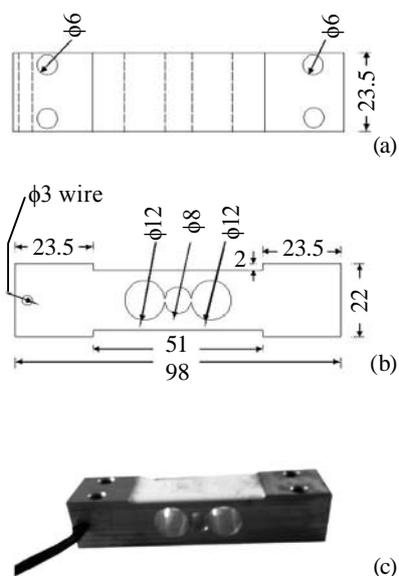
(a) Top view (b) Front view (c) Pictorial view of load cell
